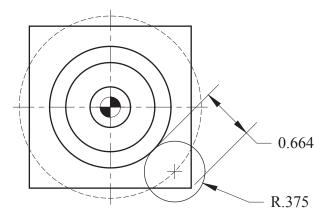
CNC Machining Center Programming Exercise 4-6, Cutter Size Requirement Calculation
